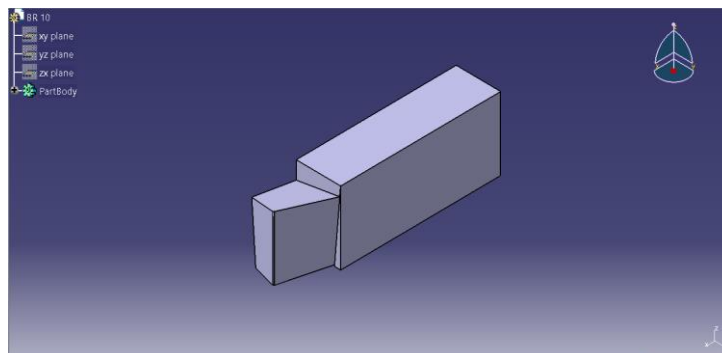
Designed Tool with Back Rake Angle  $10^\circ$
